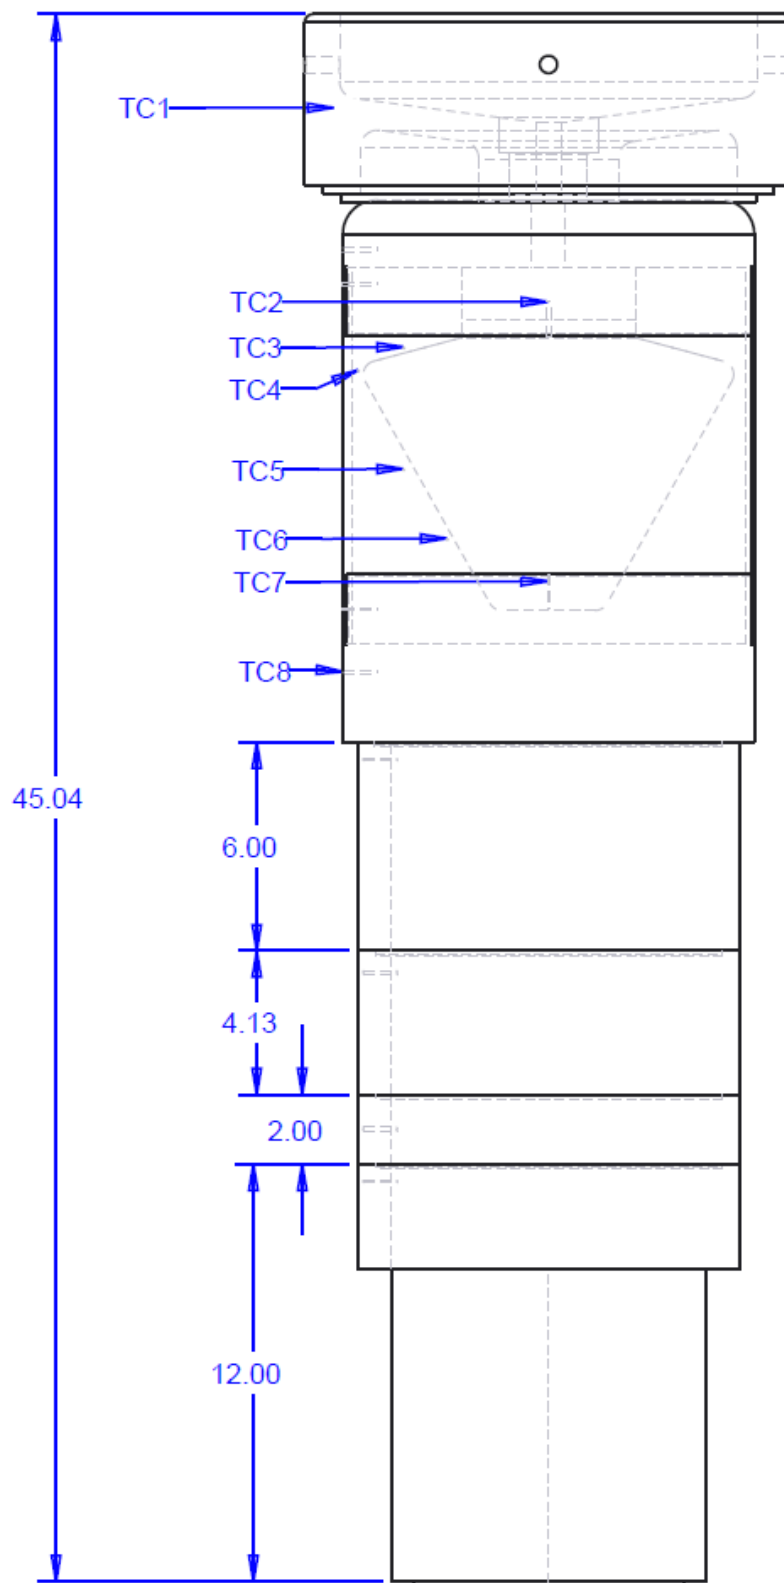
Assembly drawing for the test heat-up experiment. The bottom of the coil is 27" from the bottom of the major ordinate dimension (approximately at the bottom of the mold cavity).
